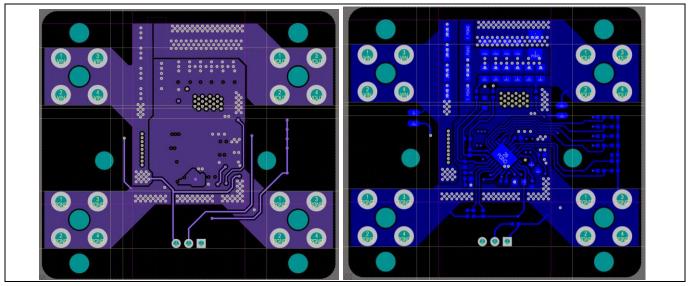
PCB layout mid-layer 4 (left) and bottom layer (right)
